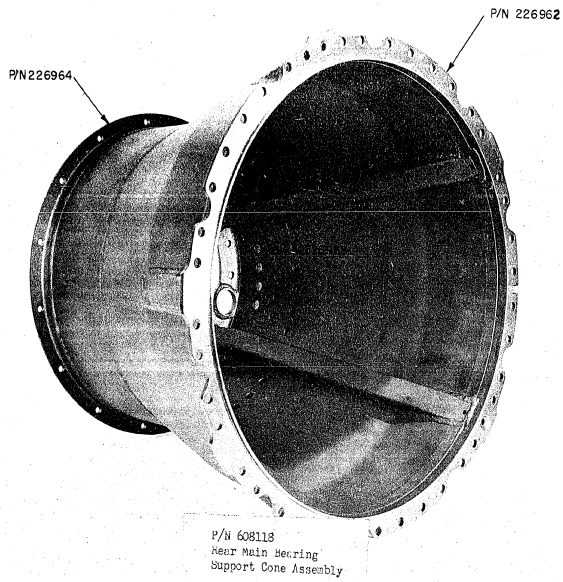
P/N 608118 - REAR MAIN BEARING SUPPORT CONE ASSEMBLY
